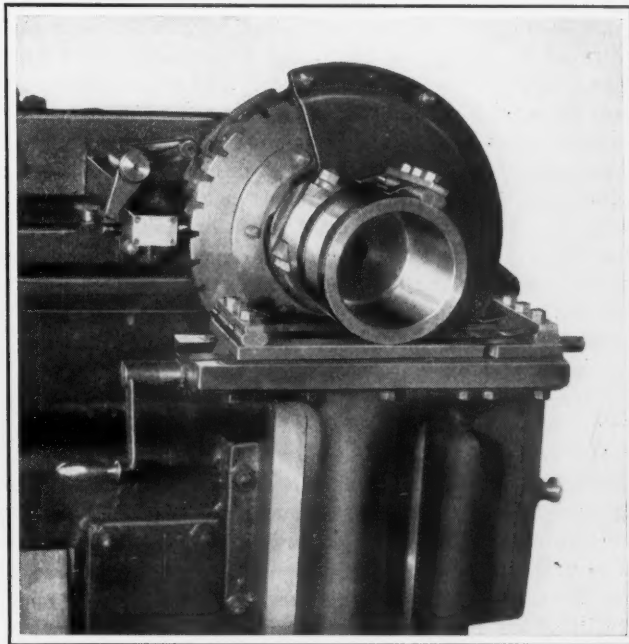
Mechanism for indexing the Gear and imparting an Oscillating Movement to the Work-spindle
